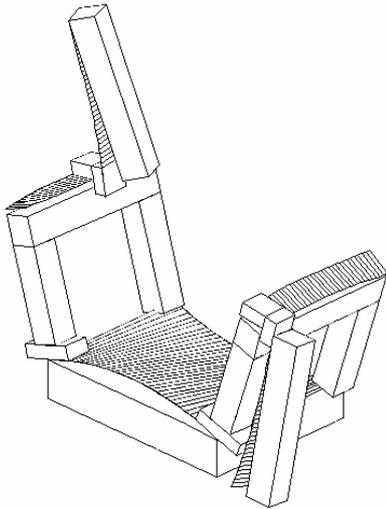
Assemblies of all bodies of a CMM, for lowest and highest positions.
